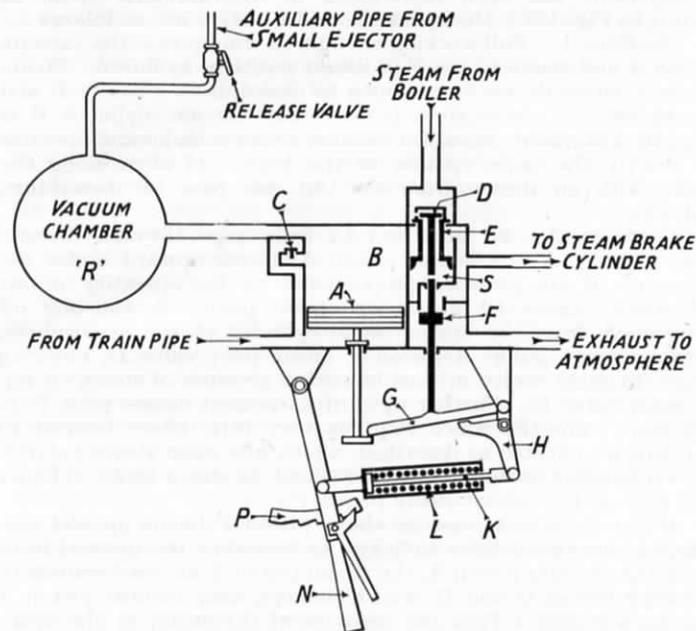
DIAGRAM OF GRADUABLE AND AUTOMATIC STEAM BRAKE VALVE MECHANISM.
